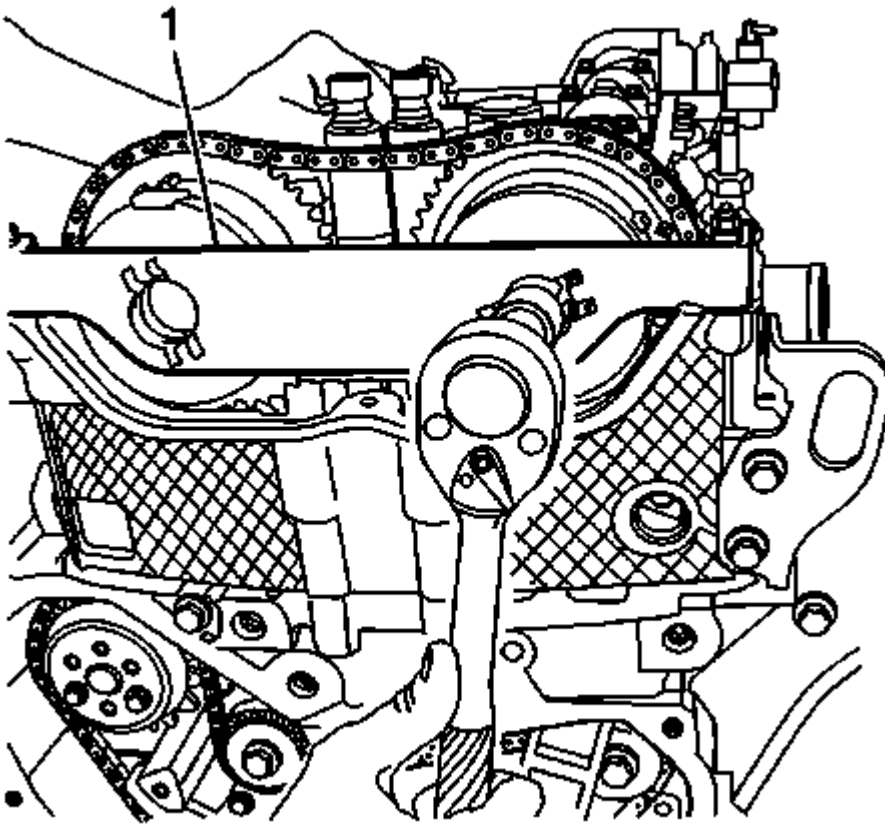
Loosening/Tightening Camshaft Actuator Retainer Bolts
